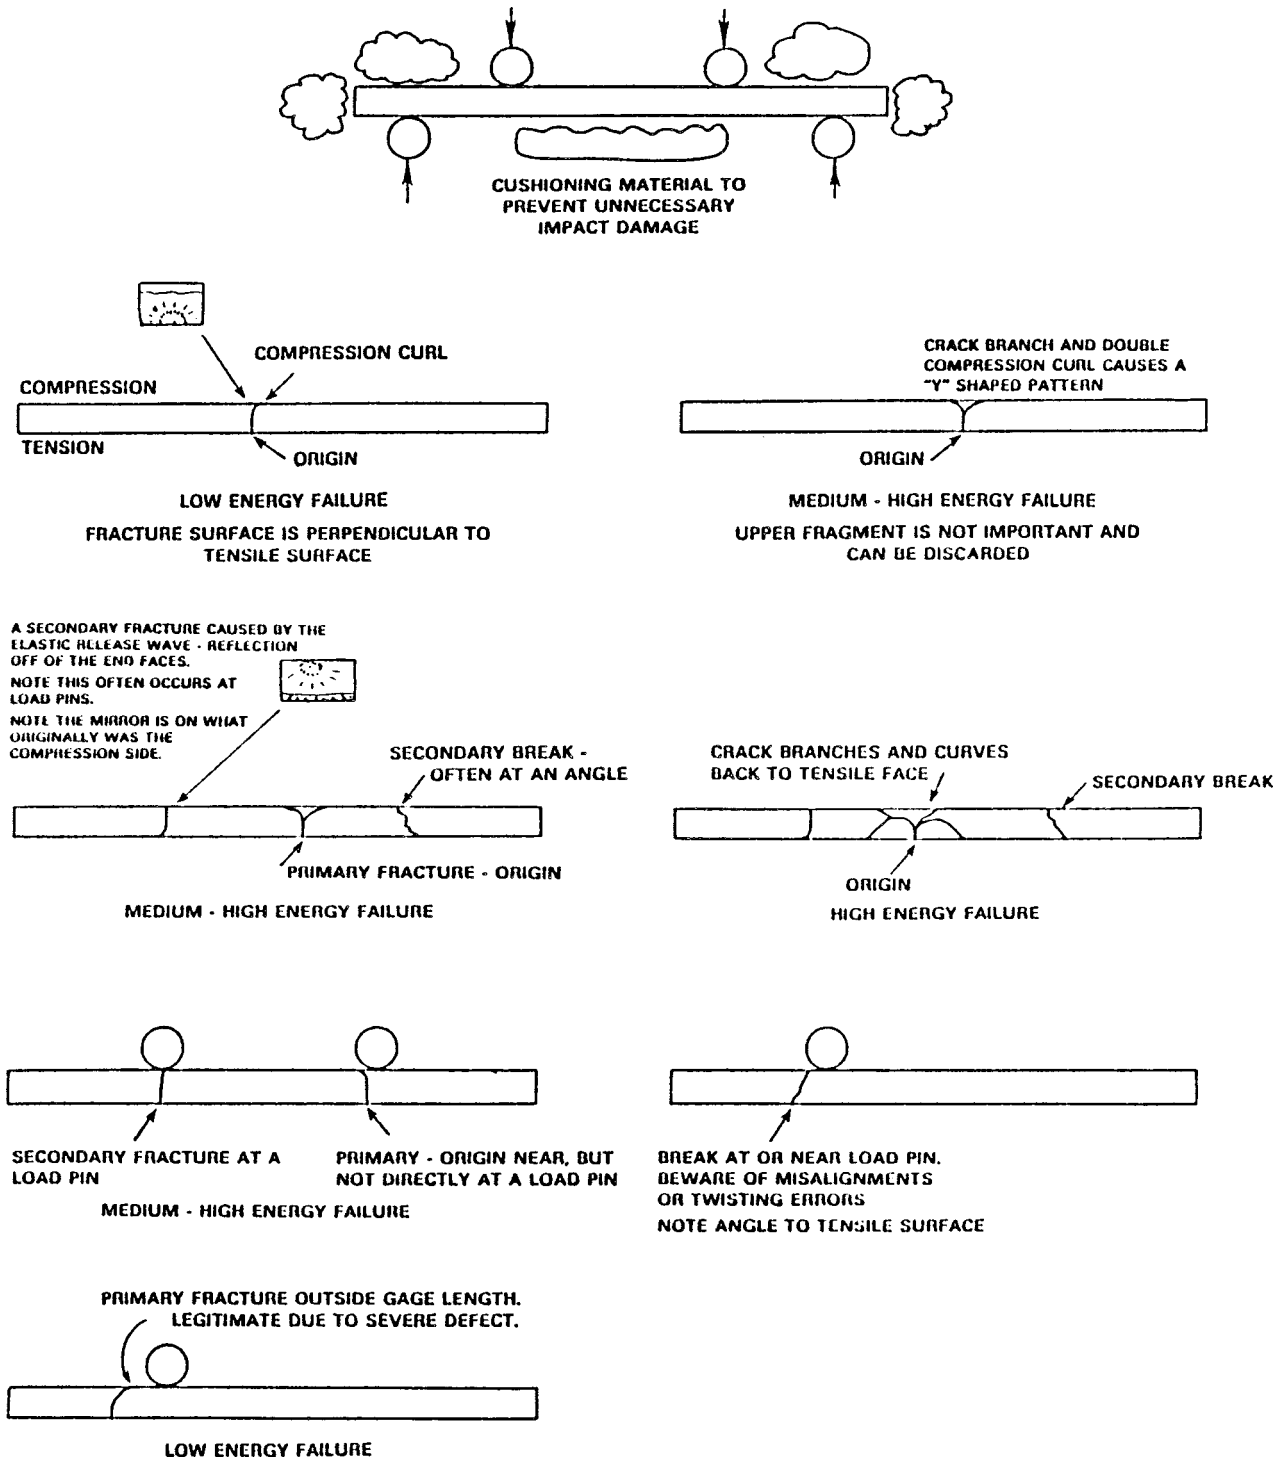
Typical Fracture and Crack Patterns of Flexure Specimens
